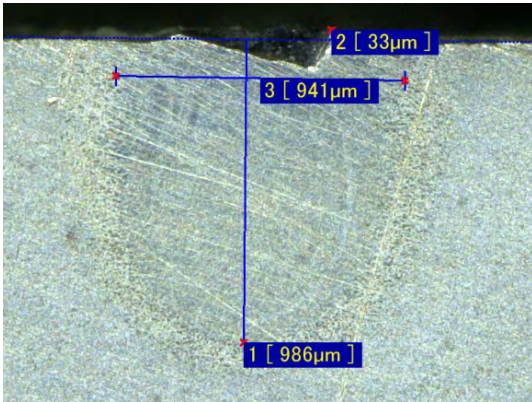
Picture of blind weld with 4 mm defocus
